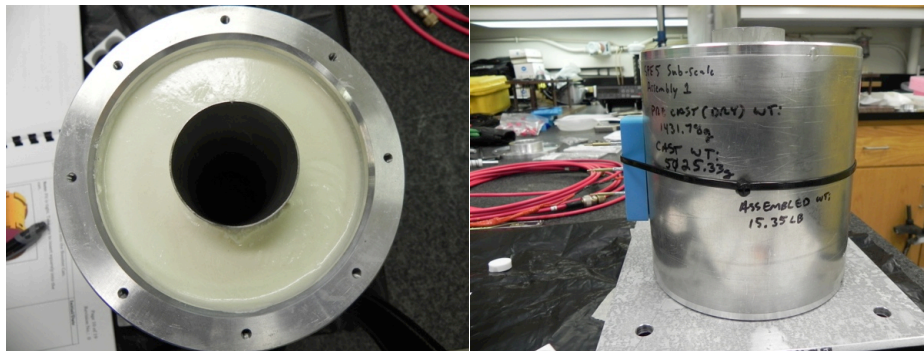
A top view of the explosive fill (left) and side view (right) before final assembly.
